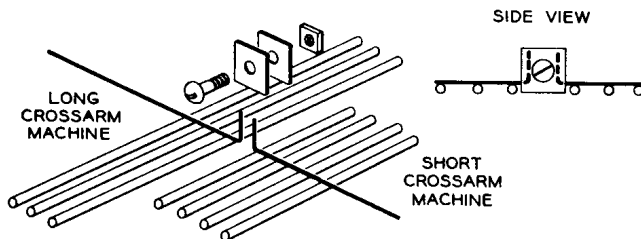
The screw clamp arrangement used to connect the two wave machines together.
